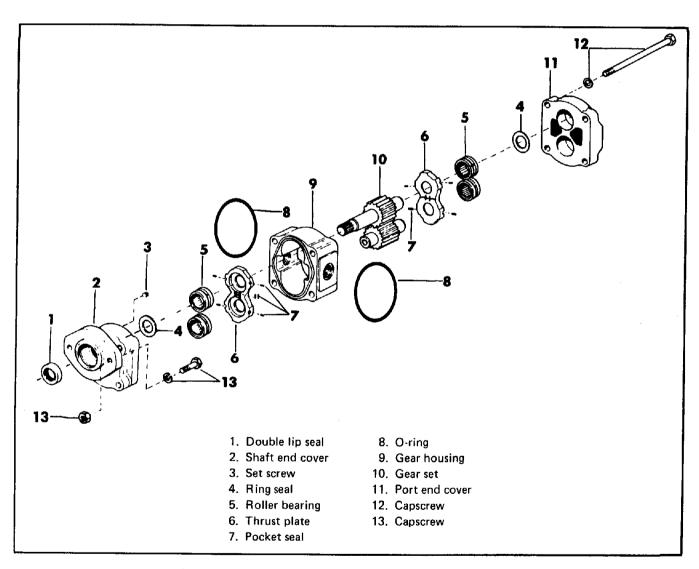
Power Steering Pump (500AI TRAVELIFT)
